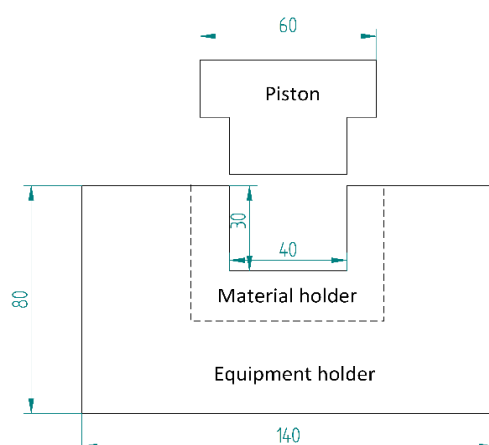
Overview over the three components mounted in the medium pressure torsion process. The equipment holder, with the sample holder within, and a piston designed to compress the sponge in the sample holder.
